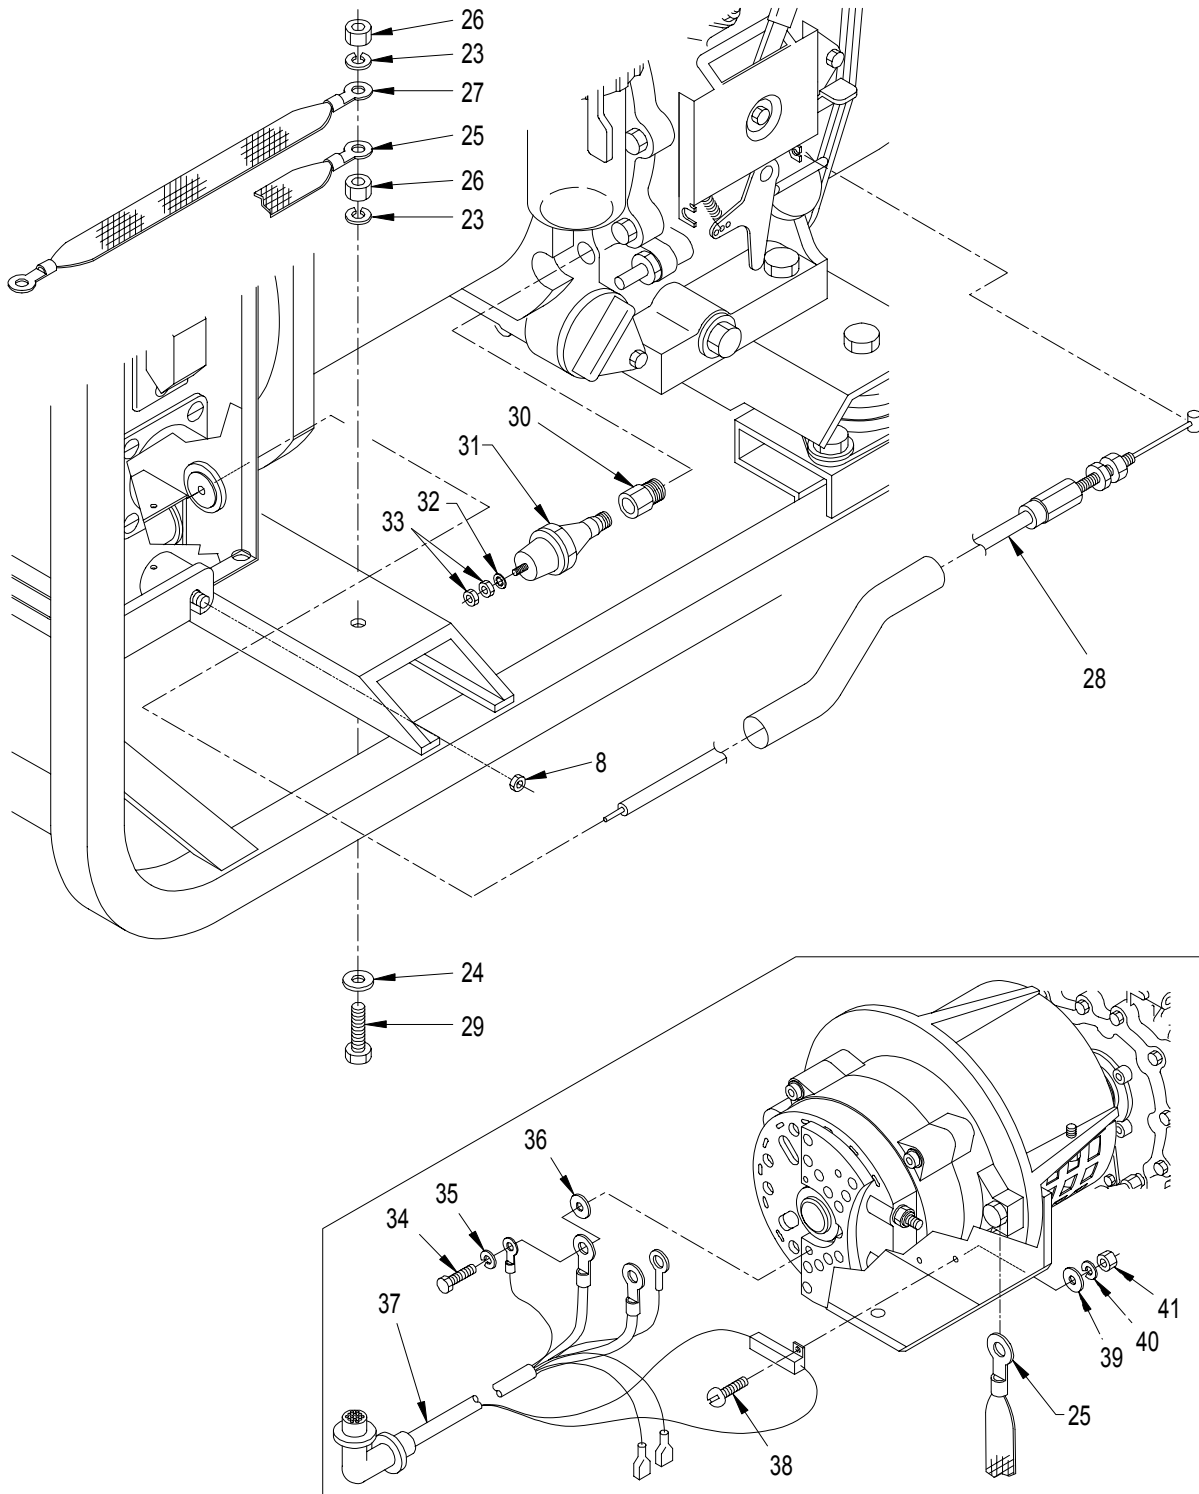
Generator Set Assembly, 2kW (MEP531A/501A) (Sheet 1 of 2)
